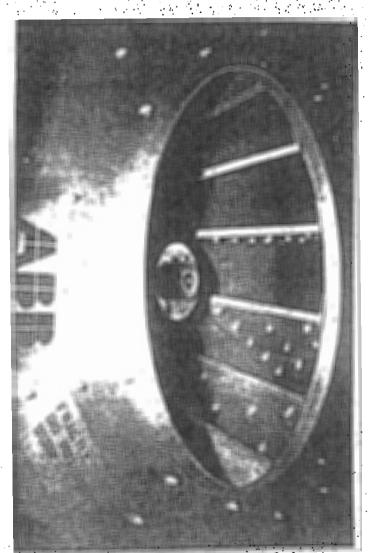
New HEF Wheel in the Existing Exhauster Casing
